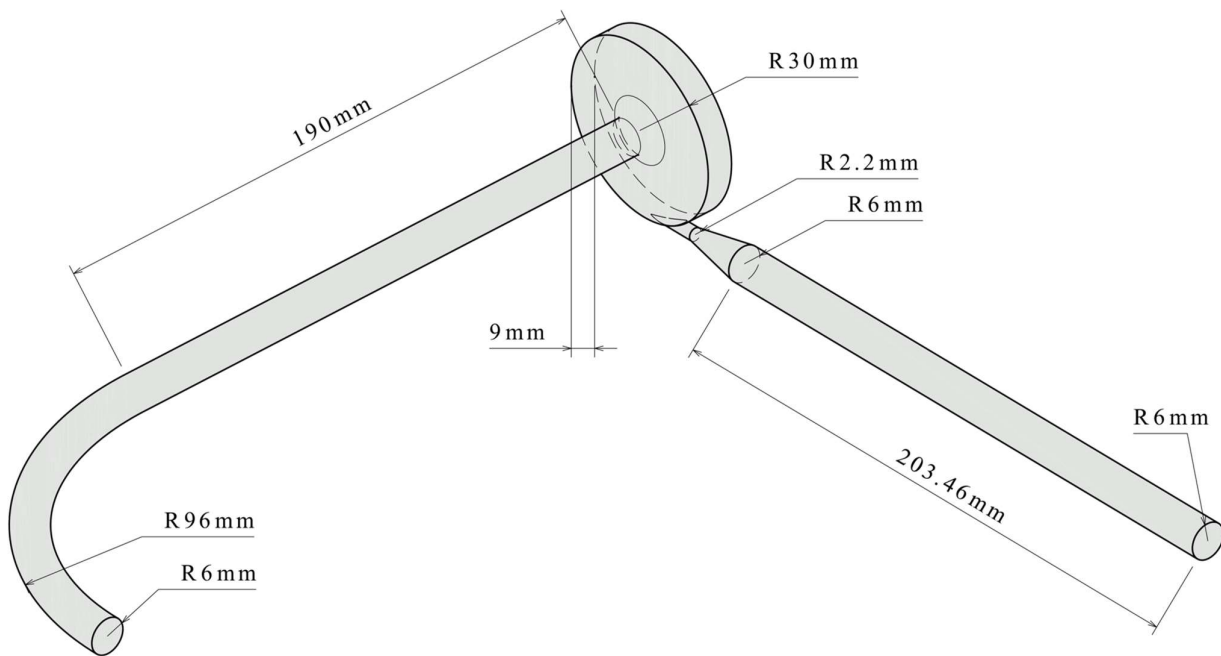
Dimensioning of the FDA pump benchmark: casing, inlet pipe, and outlet pipe [88].
